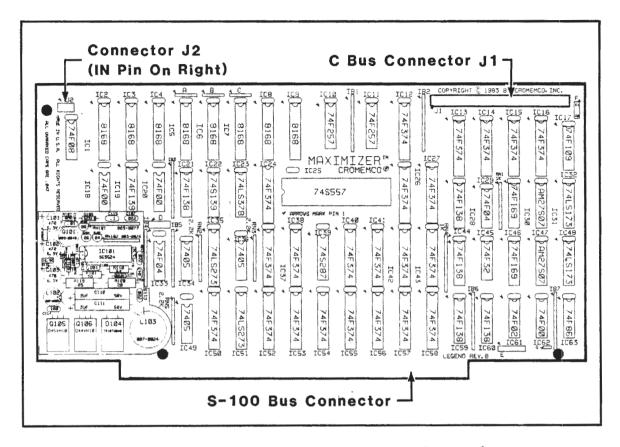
MAXIMIZER I/O COPROCESSOR (MAX-I) BOARD
